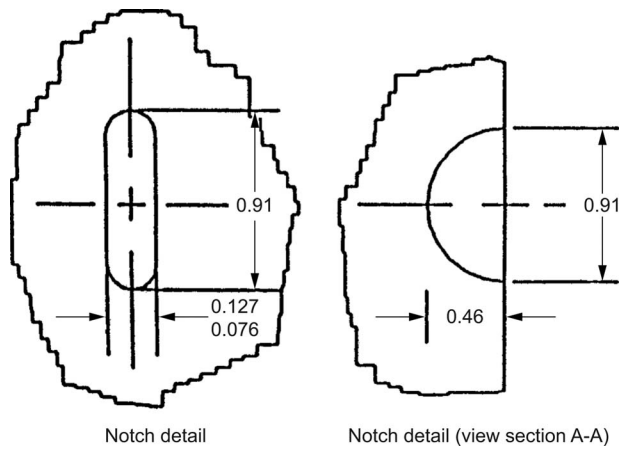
Surface flaw geometry for the ( $K_b$ ) specimen. Dimensions are in millimeters. See Fig. 2 for notch location on the ( $K_b$ ) specimen.
